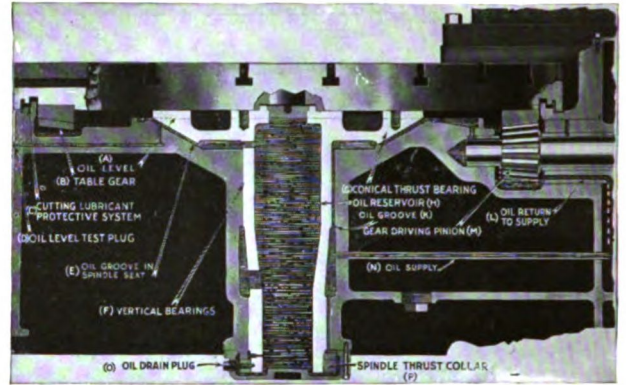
SECTIONAL VIEW SHOWING TABLE SPINDLE AND OTHER IMPORTANT INTERNAL ARRANGEMENTS
